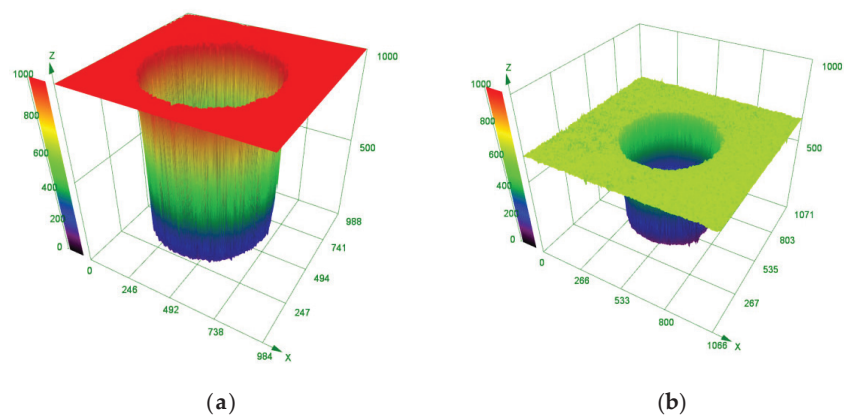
Contrasting experimental machining 3D morphology. (a) Jet-MECDM machining 3D profile; (b) Jet-MECM machining 3D profile.
